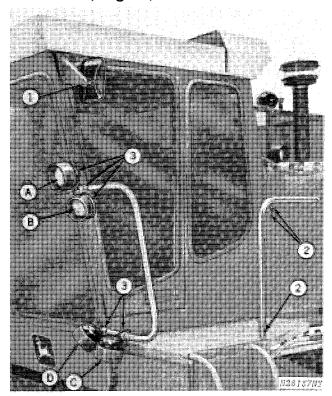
Installing Cab Mirror, Lights, and Handrails
